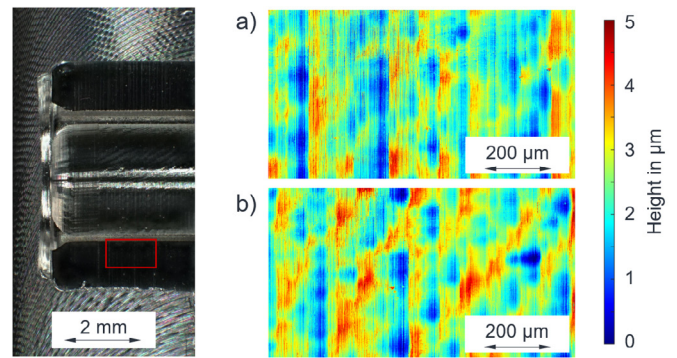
False-color plots of the machined surfaces in the area of the smallest clearance angles on the secondary cutting edge. (a) Machined part 2; (b) Machined part 401.
